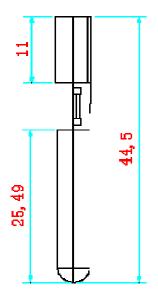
Engineering dimension drawing for blade, pin and contact for current tap for 40106A (unit:mm)
